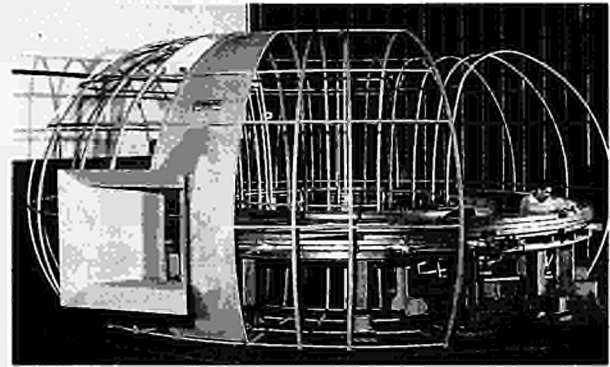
Pre-assembly of the Divertor Coils No:D2 and No:D3 on the assembly tables in the factory
